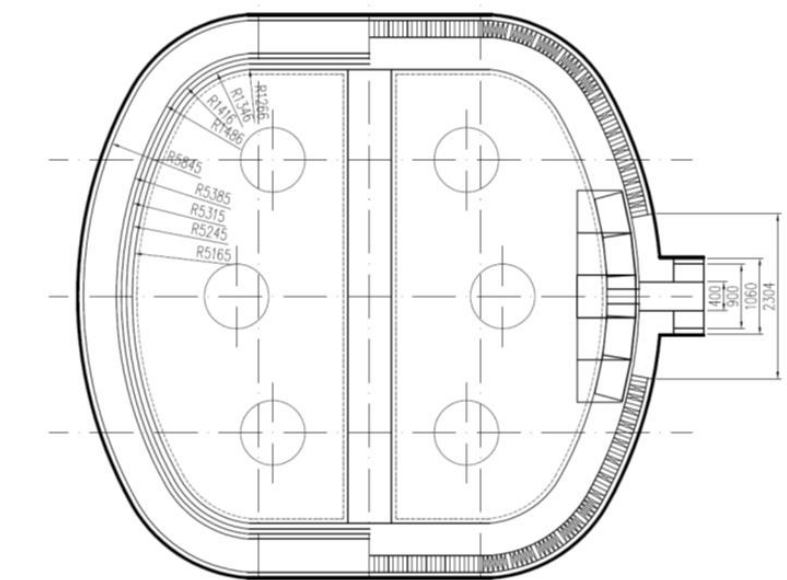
Plan view of Furnace XVI (six-electrode layout)
